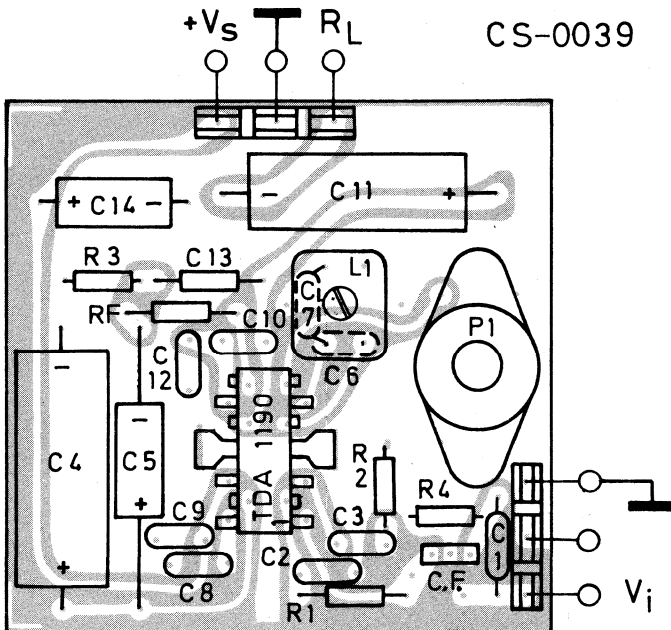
P.C. board and component layout of the circuit shown in fig. 16 (1:1 scale)
